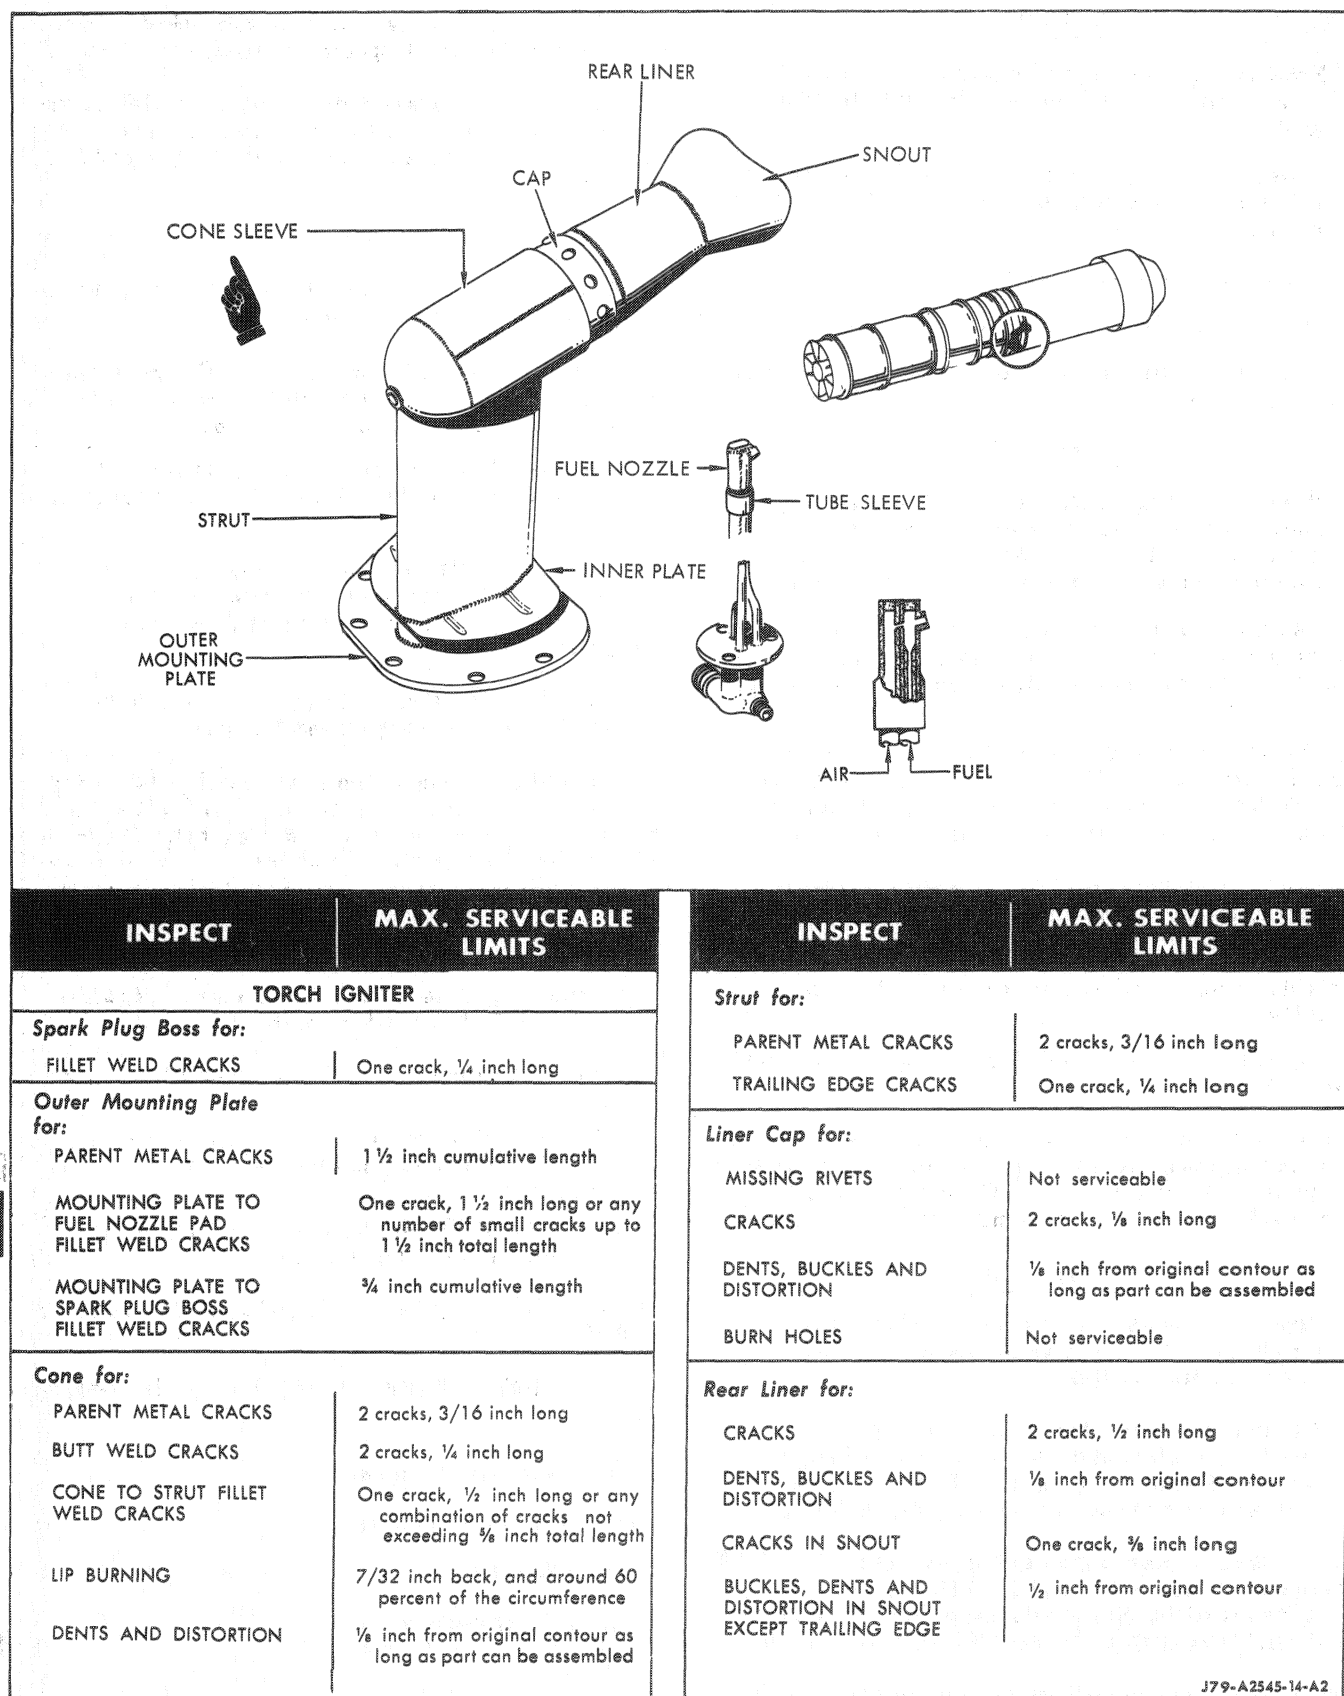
Torch Igniter Limits (Sheet 1 of 2)
